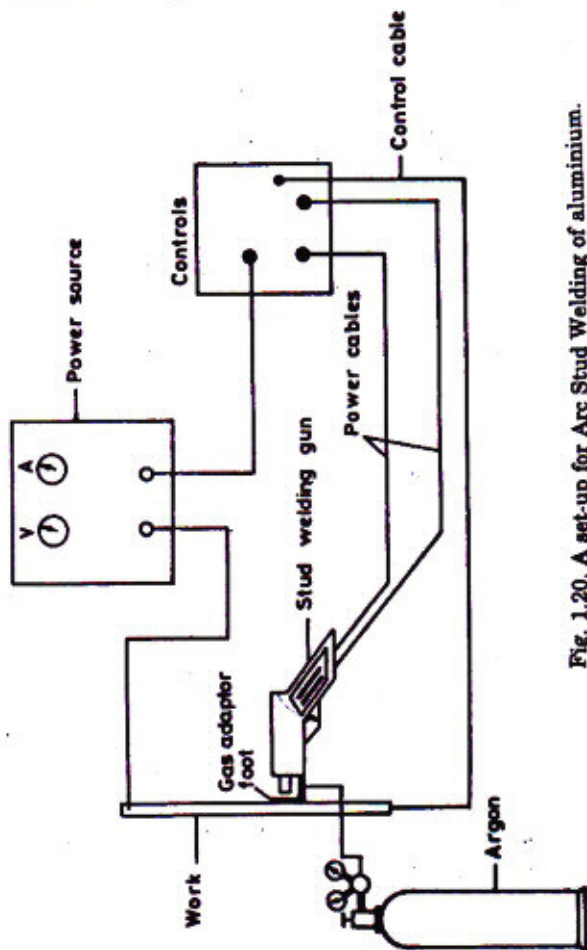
A set-up for Arc Stud Welding of aluminium.
